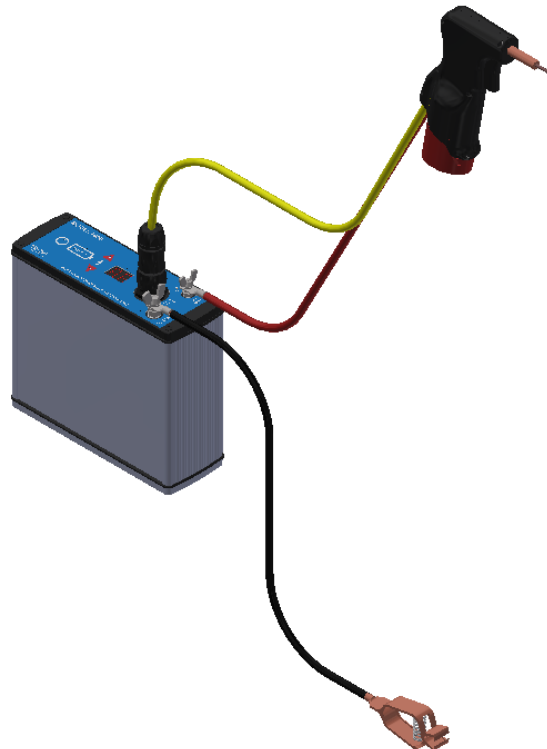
Fully Assembled 700B Handle and Clamp Cables
